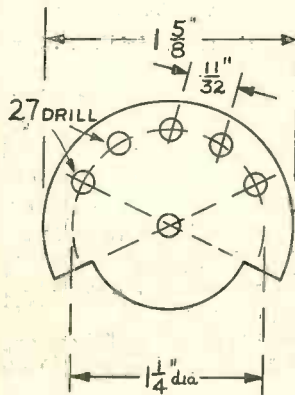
WORKING DRAWING OF THE CATCH PLATE OF THE VOLTMETER SWITCH.
